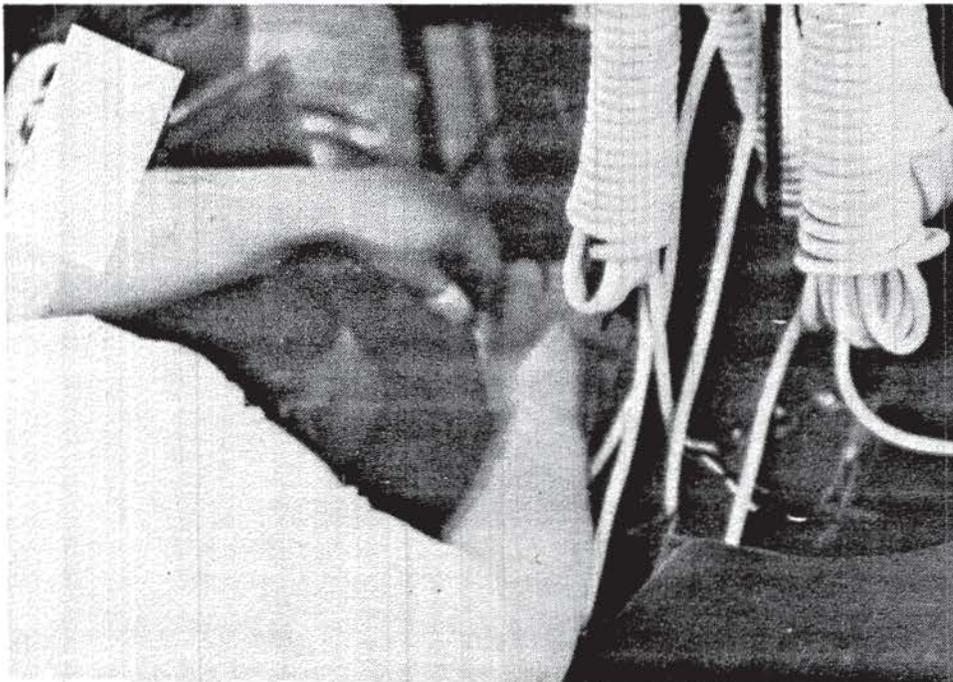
Inserting blades into plug housing fixture on the Miller Molder,
